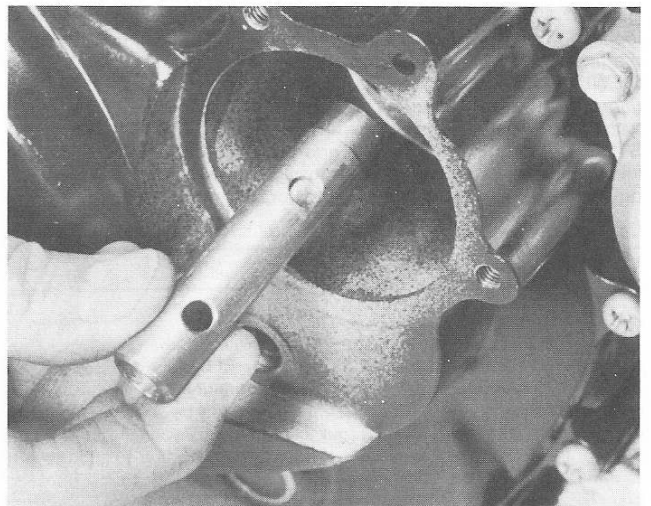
Adjusting the valve clearances (Sec 16)
